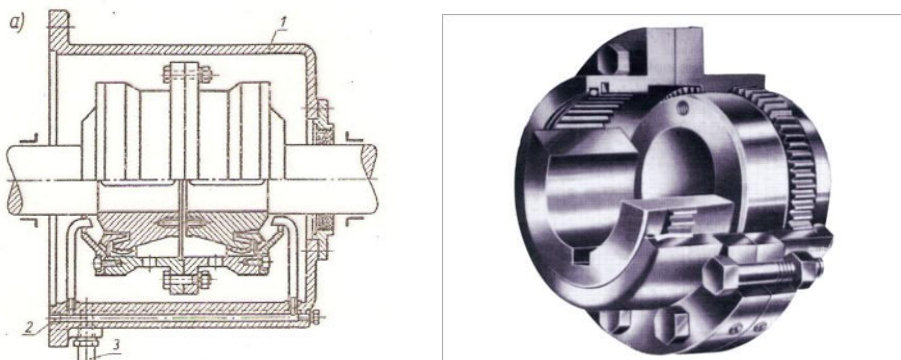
Gear coupling (misalignment & offset) [10, Rexnord Industries]
